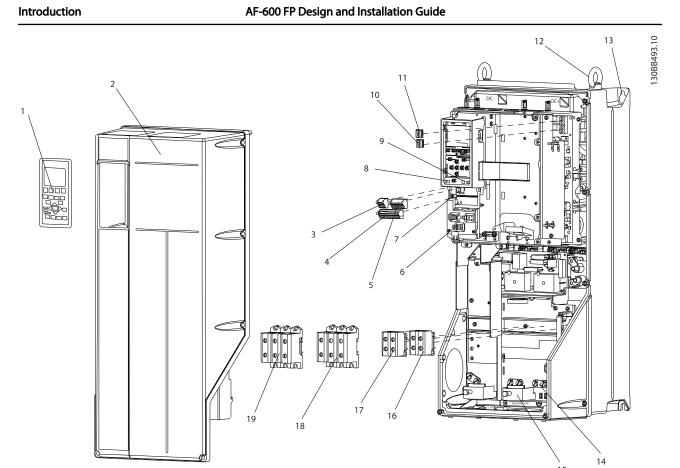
Exploded View Unit Sizes 15, 21, 22, 31, and 32
